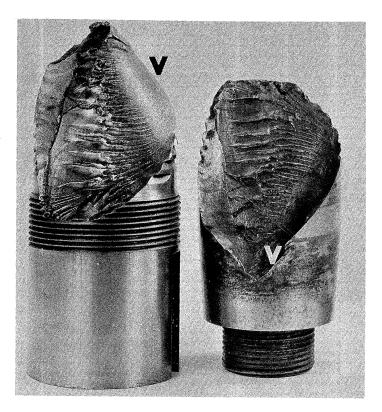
Torsional Fatigue Failure at Front End of Crank Shaft.
